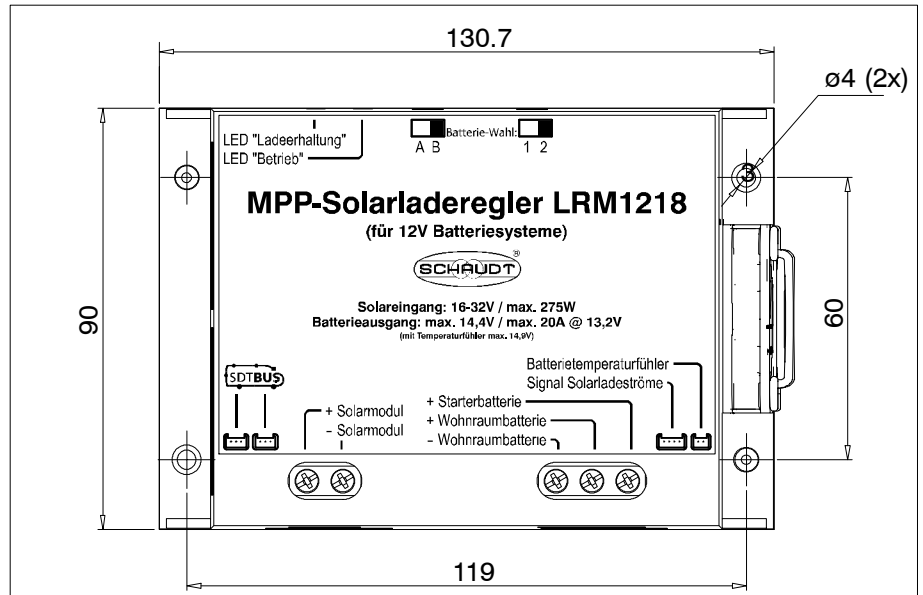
Attachment points for LRM 1218 solar charge regulator (dimensions in mm)
